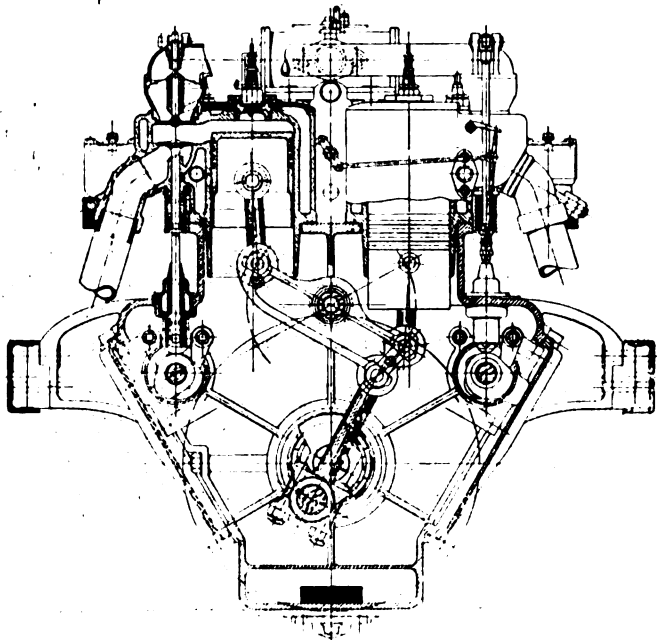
Sectional View of the All-British Eight-Cylinder Engine.
